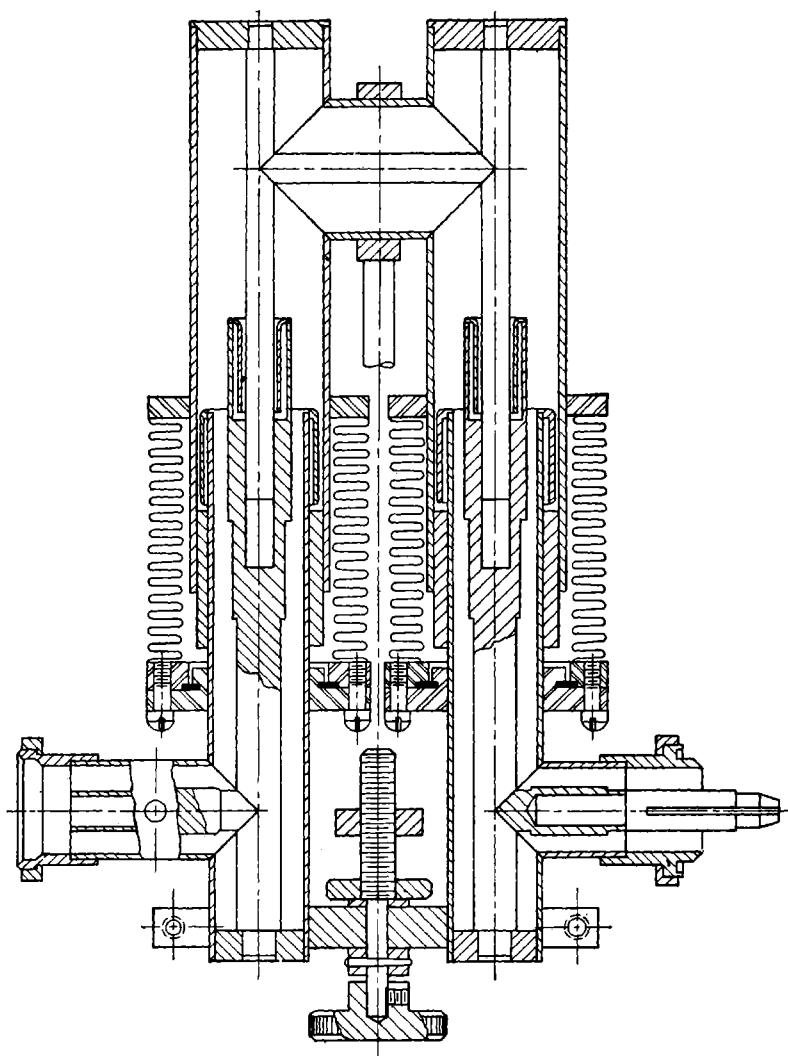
Cross-section view of coaxial phase shifter.
